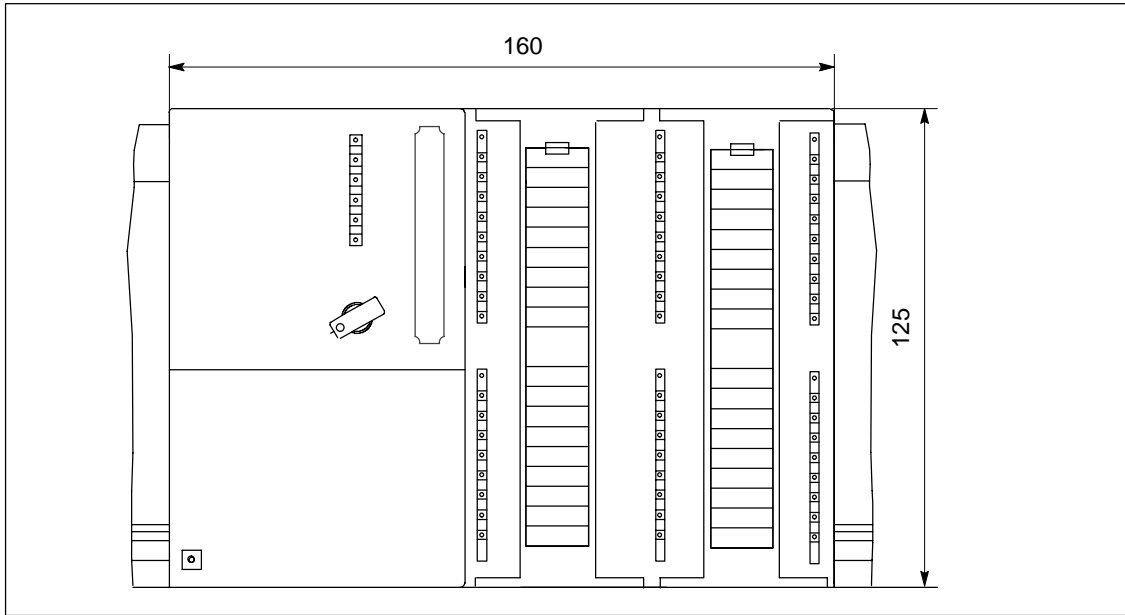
Dimensioned Drawing of the CPU 314 IFM, Front View
